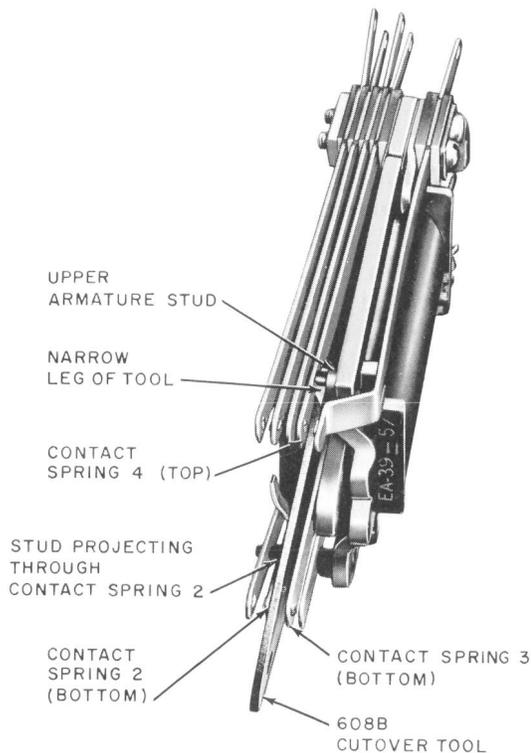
Blocking EA39 Relay for Cutover Purposes
